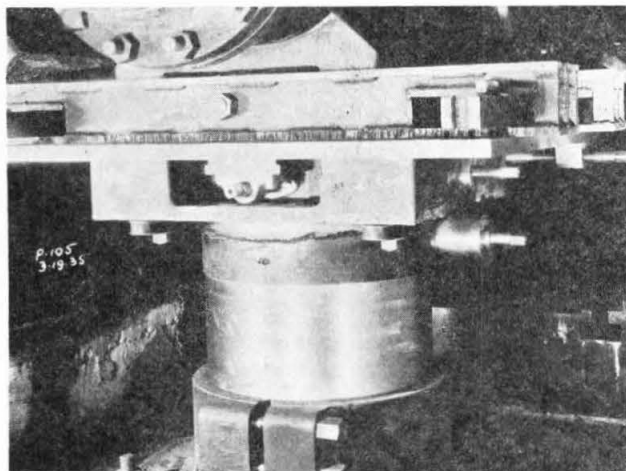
ADJUSTABLE BASE FOR MOUNTING TEST UNITS
